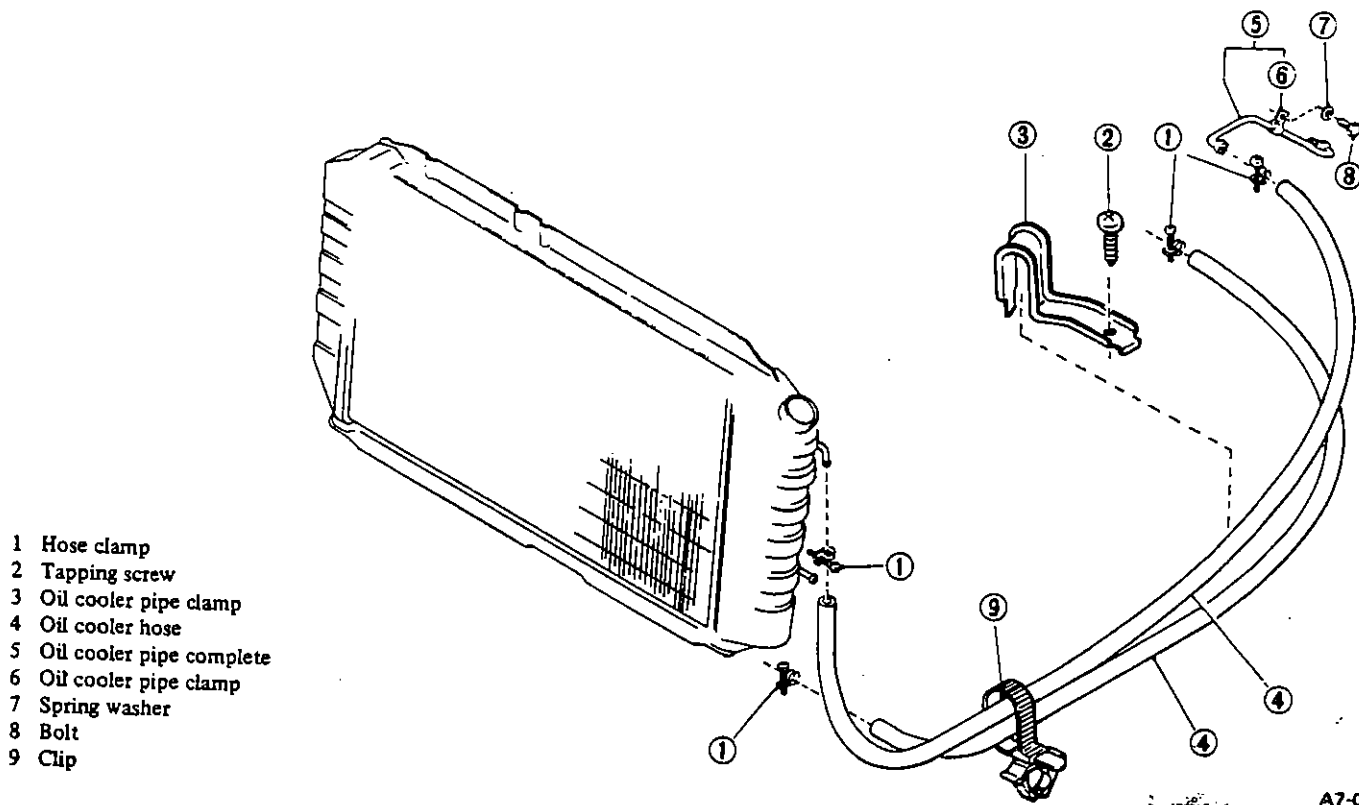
Engine cooling system [Oil cooler (AT)]
